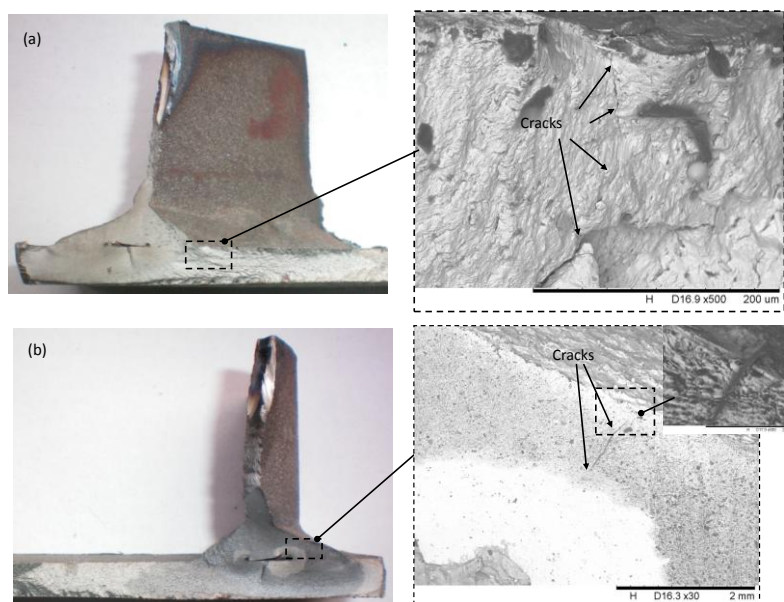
Failure surface and micrograph of the web-to-flange welded joint: (a) crack initiation from weld toe, (b) crack initiation from weld root
